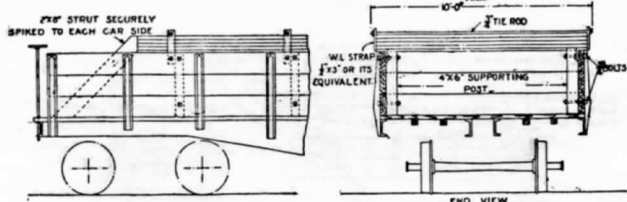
D. MANNER OF SECURING FLAT PLATES LOADED ON TOP OF CAR SIDES.
